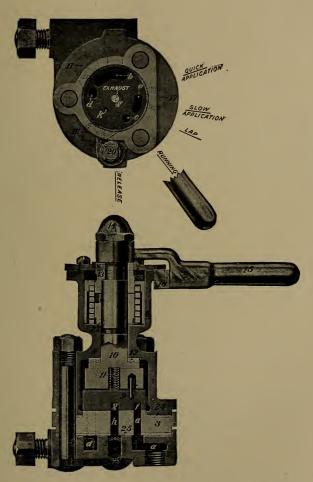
S-6 Independent Brake Valve, Sectional View.
